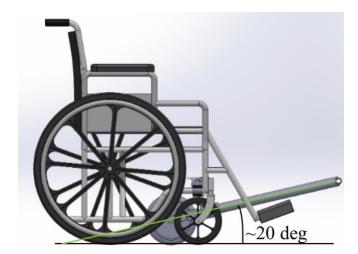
CAD model showing the attachment angle with hook and gate latch design.
